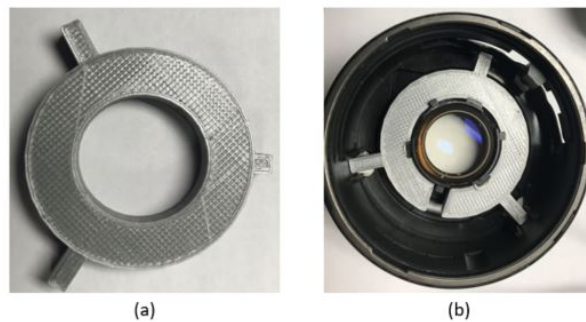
(a) 3D printed back lens mount. (b) Lens and mount placed within housing.
